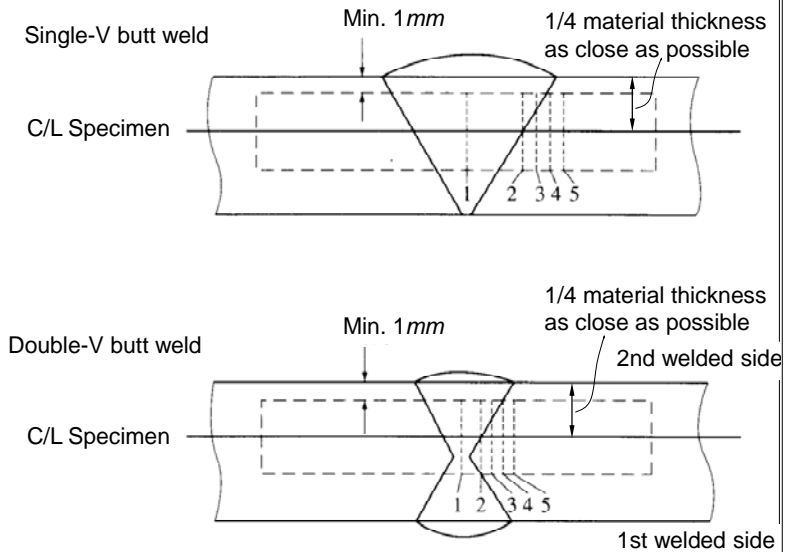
Sampling position of Charpy V-notch impact test specimens (Weld)
